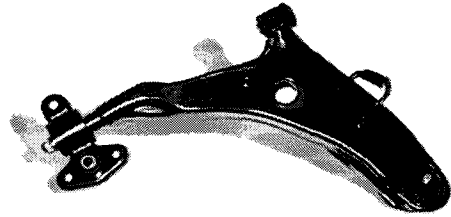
(a) A conventional stamping-welded lower arm assembly
